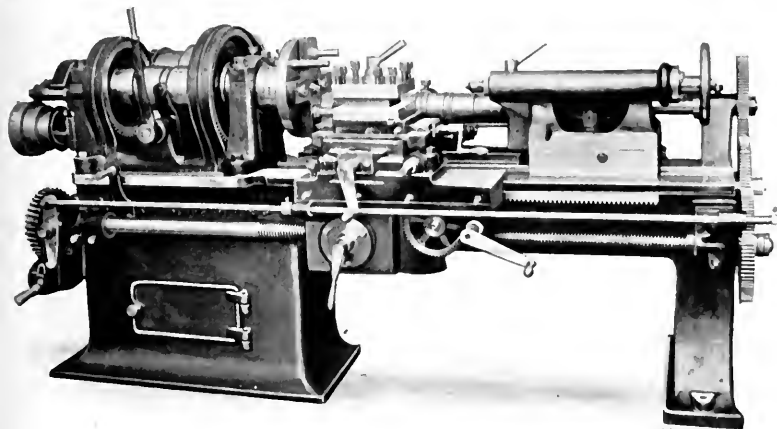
Front View of Forming Lathe built by John Holroyd & Co.
